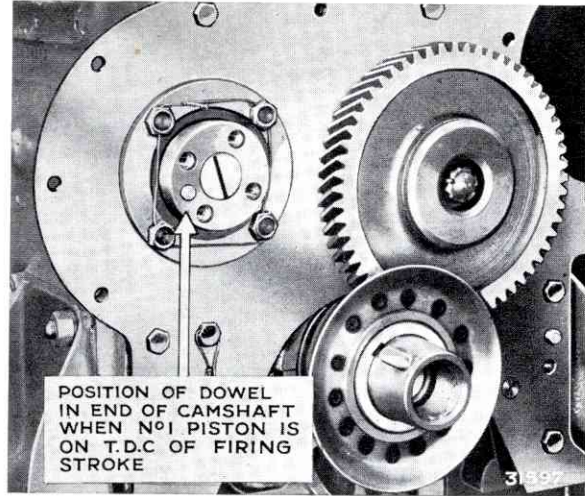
GEAR LOCATING DOWEL IN CAMSHAFT END
